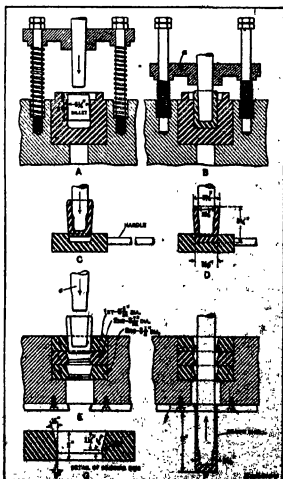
Diagram illustrating Holinger process of making shrapnel forgings in hydraulic forging process.
